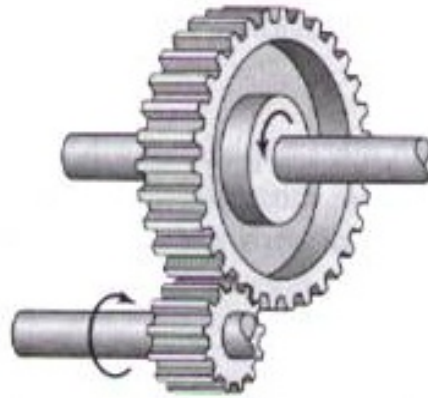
Reduction gearing system (Youssefi 2006). The fast moving small gear drives the larger gear at a slower rate (Nikolaidis 2005).
